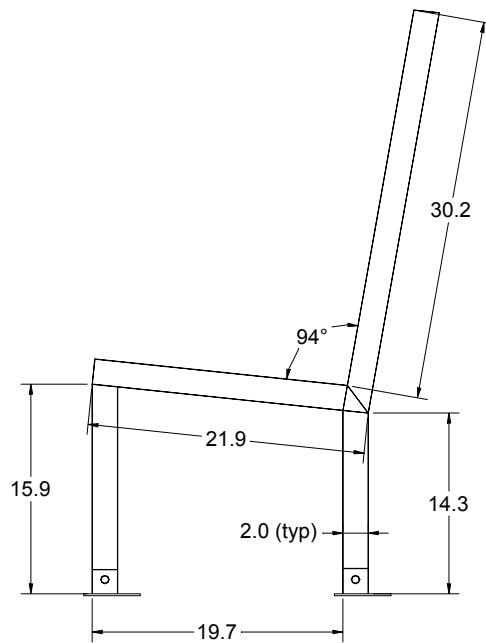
SEAT FIXTURE (all dimensions in inches)
